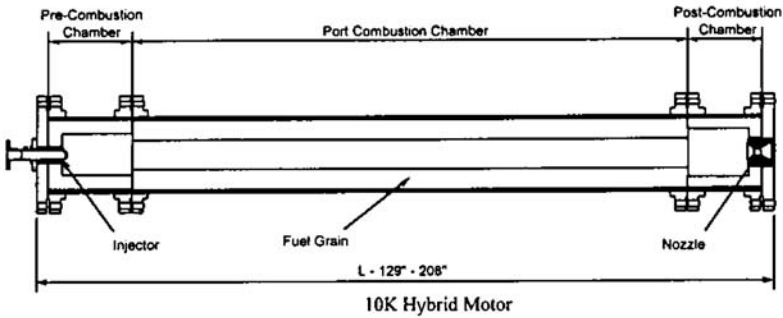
AMROC 10,000-lbf hybrid motor [10].
